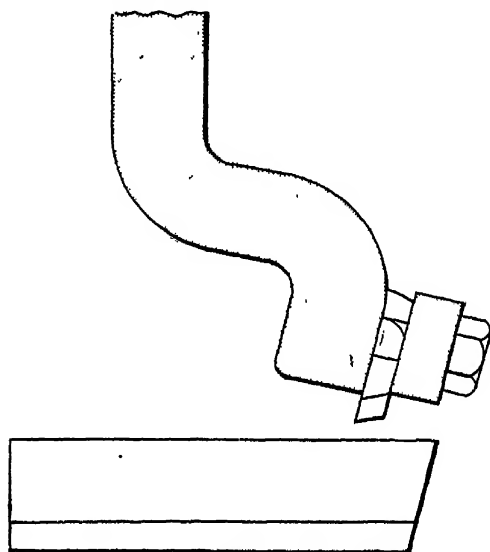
USING A TOOL IN A SHAPER FOR PRODUCING A STRAIGHT FORM TOOL
